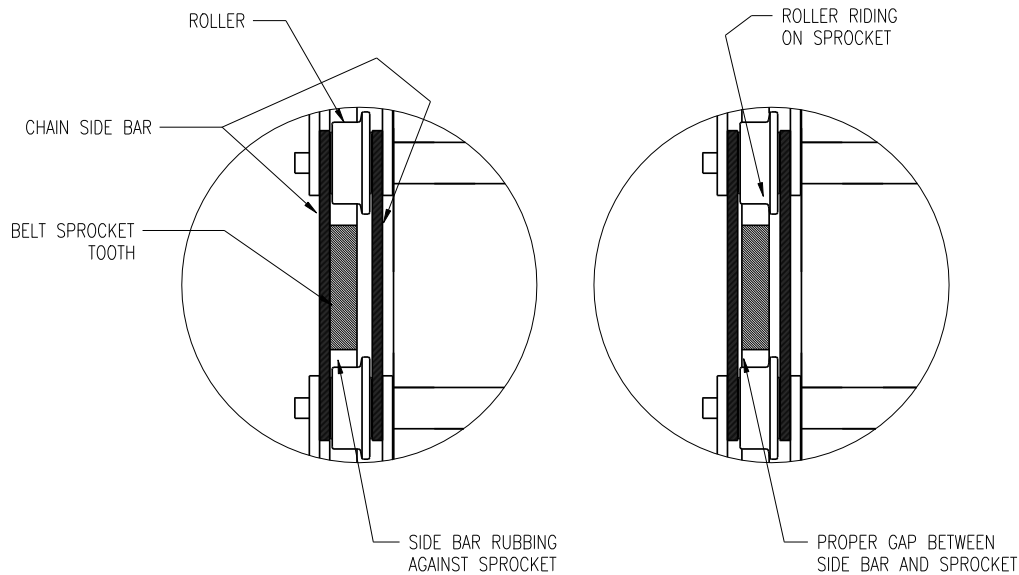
Top view of head or tail shaft at belt sprocket showing proper clearances between belt side bars and sprocket teeth.
